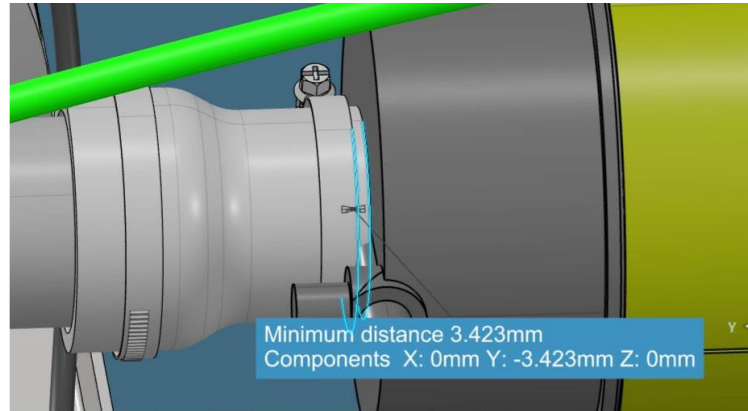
Air Compressor Coupler Clamp to Air Compressor
